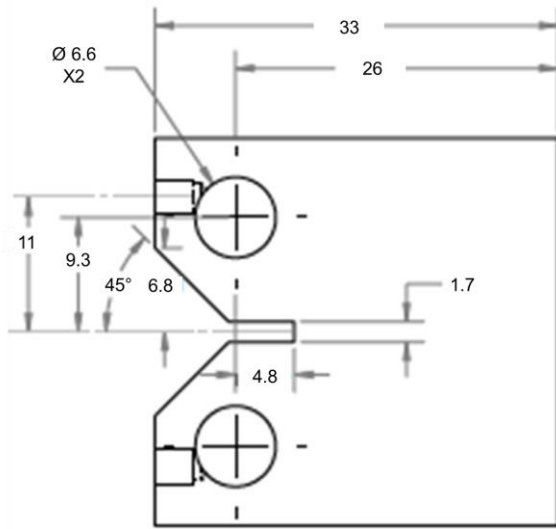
COMPACT TENSION (CT) SPECIMEN GEOMETRY USED FOR CONDUCTING FRACTURE RESISTANCE TESTS. ALL DIMENSIONS ARE IN MM.
